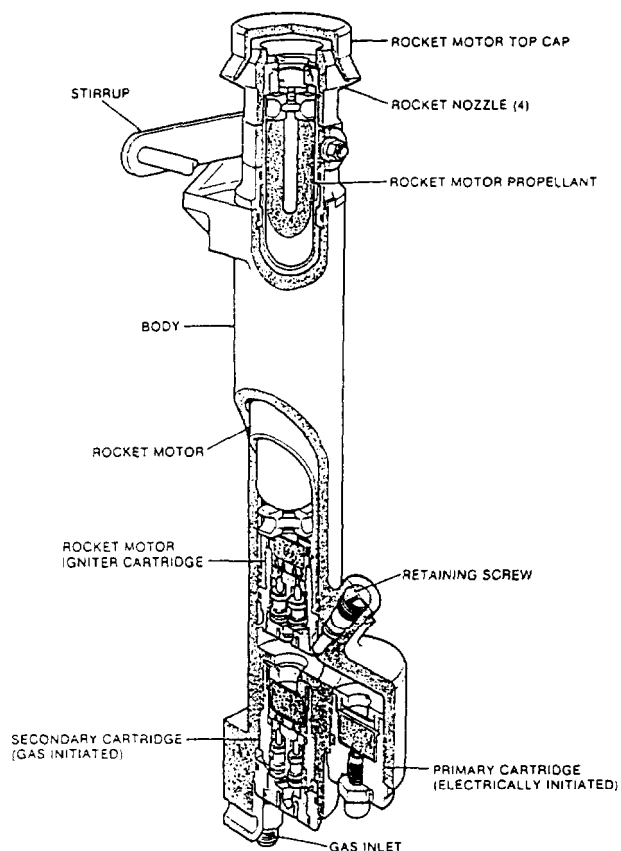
Parachute deployment rocket motor (Mk 122 Mod 0).
